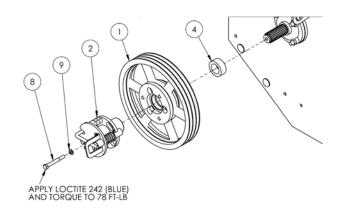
Install Chopper Sheave & Clutch on Rear Flail Shaft
